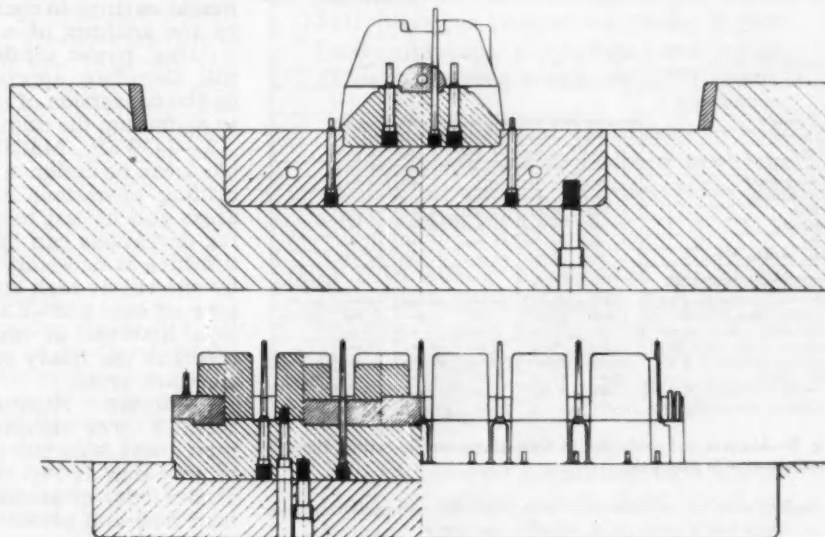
Cover die of engine block in die-casting machine weighs 8 tons.
